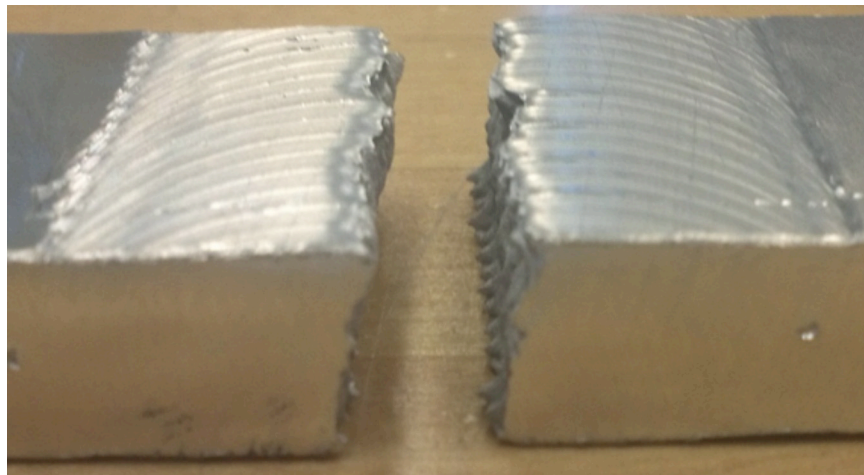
Fracture surface of laser cleaned weld (240 W, General Lasertronics).
